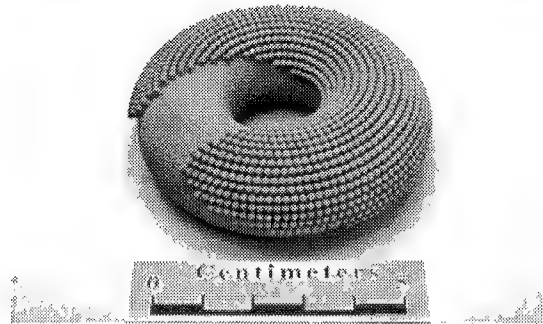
3D printed torus of CAD model of figure 1a texture.
